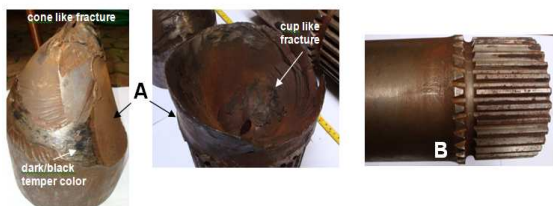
The as received broken quill shaft A and the unbroken quill shaft B for metallurgical assessment. The broken quill shaft A consists of two separated damage portions, one in a cup like fracture and the other in a cone like fracture
